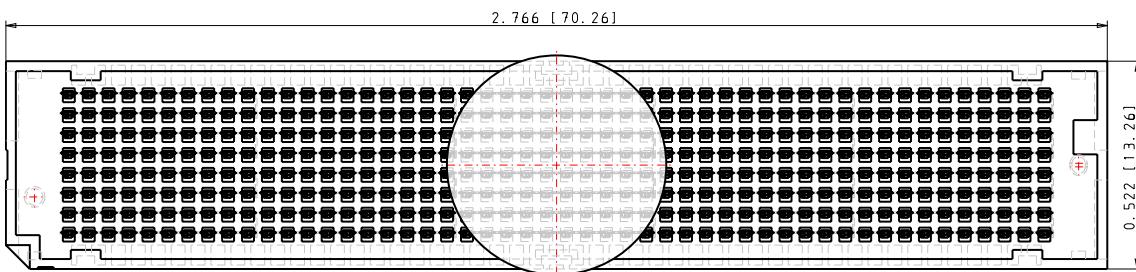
Part drawing of a LPAM 8×50 connector
